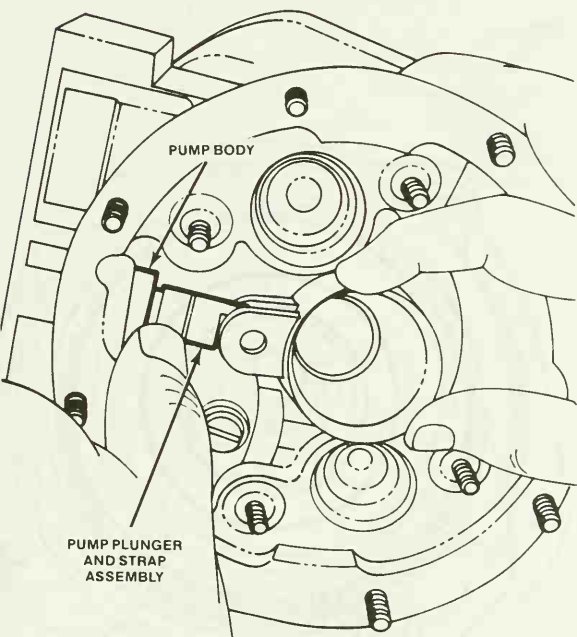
Removing the pump plunger and body. (American Motors Corporation)
